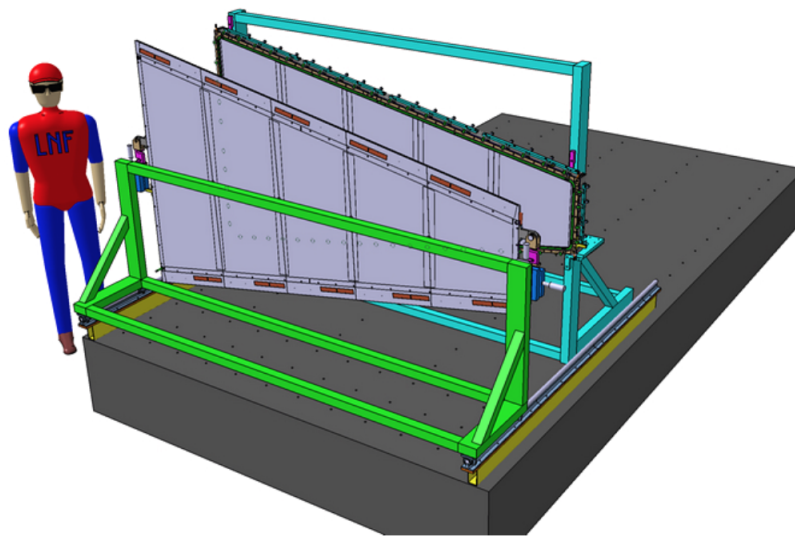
Schematic view of the Frascati assembly station during the assembly of layer 4. The external drift panel with the stiff-frame is mounted on the assembly tool (blue structure). The stereo RO panel is mounted on the assembly cart (green structure) on the sliding tracks.
